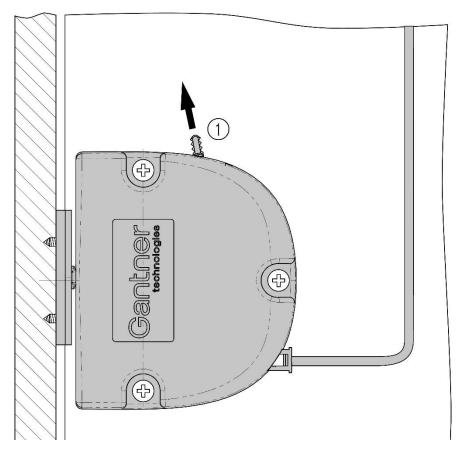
Locking pin of the GAT SMART.Lock 70x1
